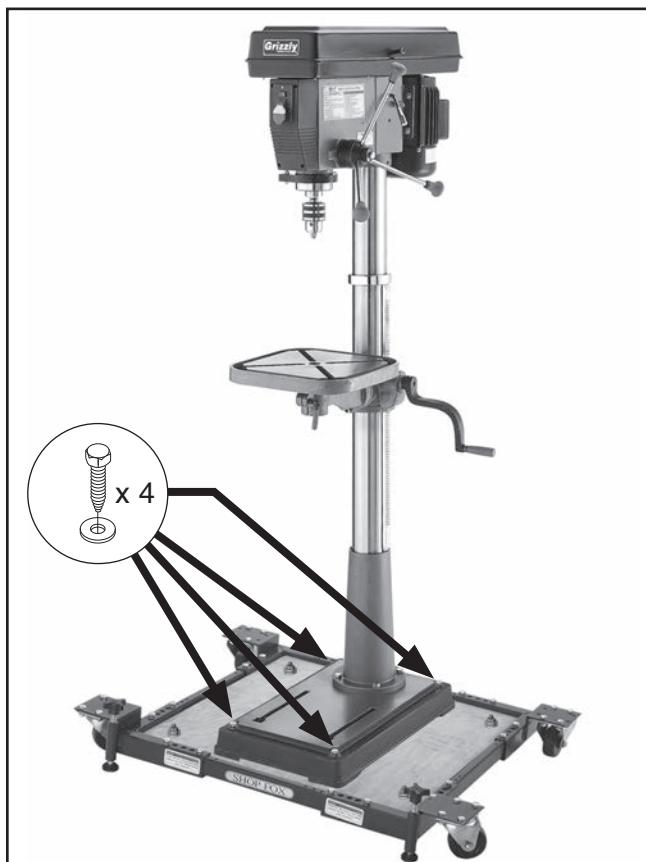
Drill press bolted to mobile base, using lag bolts and flat washers.
